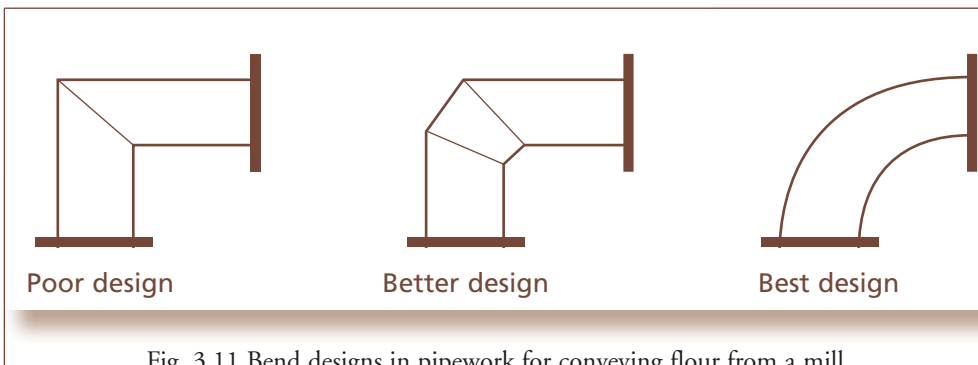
Bend designs in pipework for conveying flour from a mill
